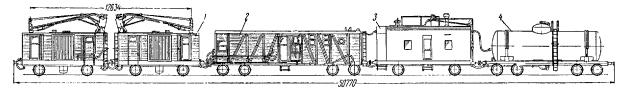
Sketch of a mobile unit for servicing diesel locomotives in railroad yards. This unit consists of two cars that supply sand, one car that supplies fuel, one car containing a steam boiler, and a tank car. The unit can be moved by any locomotive and requires reloading only once every 24 hours.
